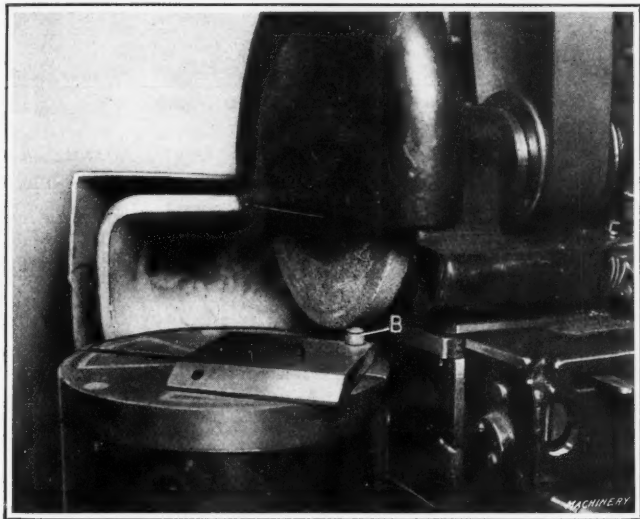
Simple Wheel Truing Device for Use on Heald Piston Ring Grinding Machine
